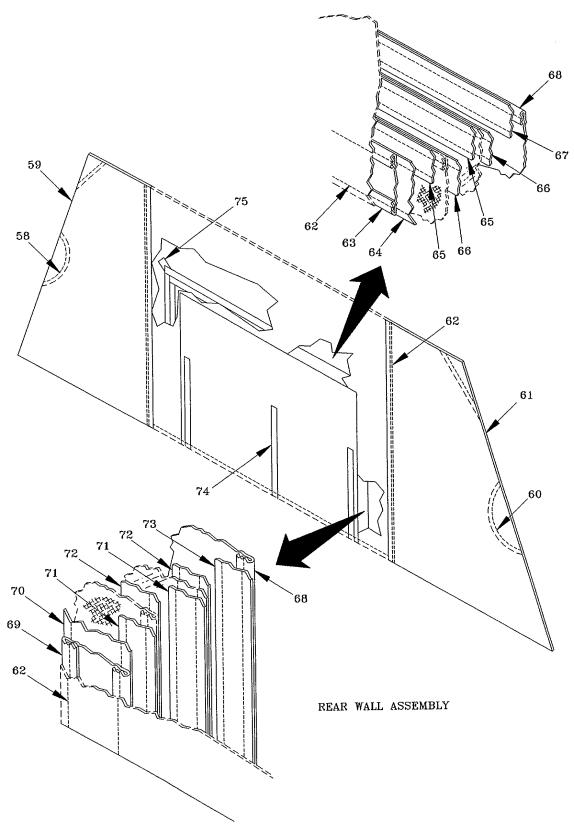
TENT BODY ASSEMBLY (Sheet 7 of 10)
